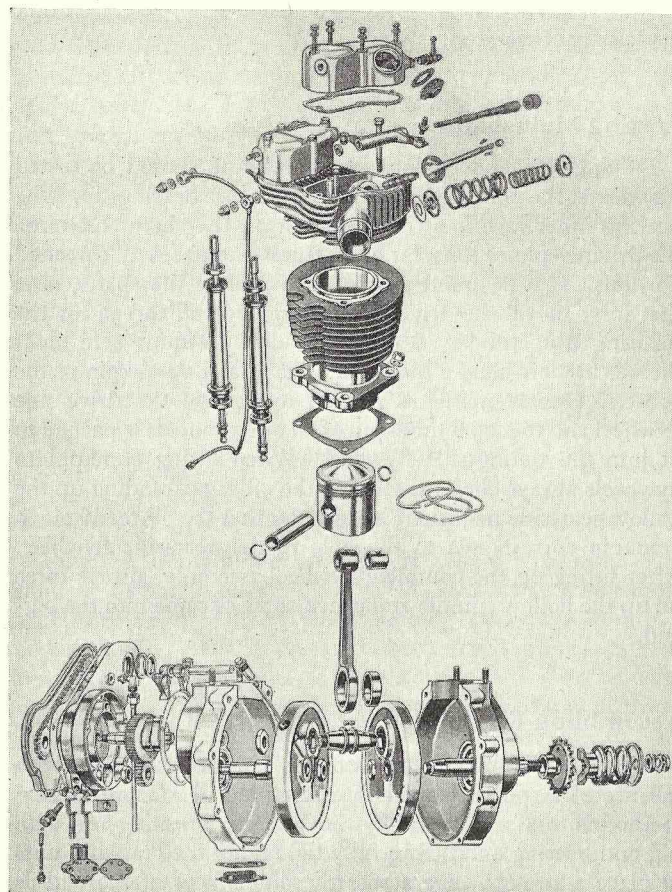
EXPLODED VIEW OF THE 1938-59 350-C.C. SINGLE-CYLINDER O.H.V. ENGINE ASSEMBLY.
